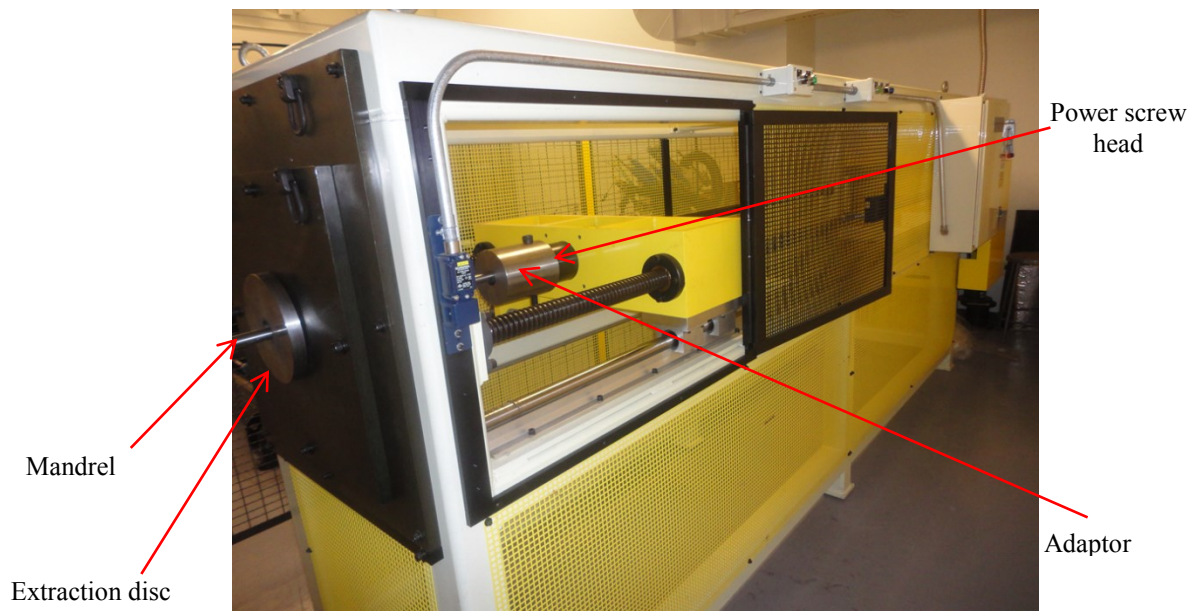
Designed parts for mandrel extraction, assembled in the power screw extractor
